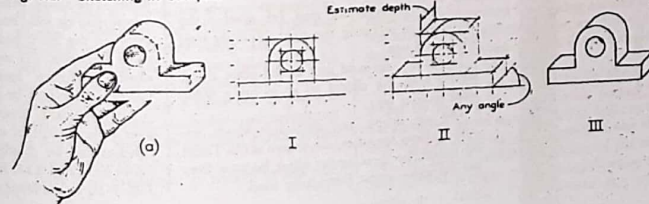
Oblique Sketching on Cross-Section Paper.
